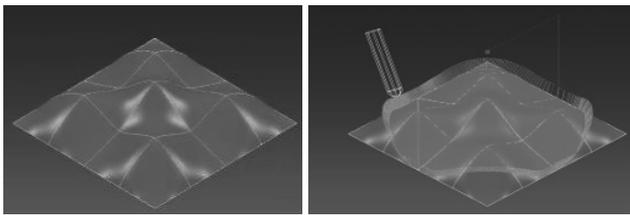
Geometrical profile of a free surface and its cutting tool path planning
